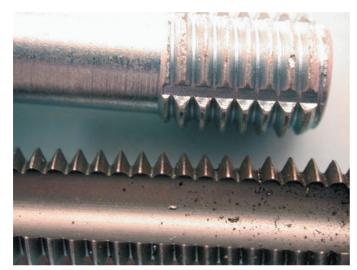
A thread chaser is shown at the top compared to a tap on the bottom. A thread chaser is used to clean threads without removing metal.
